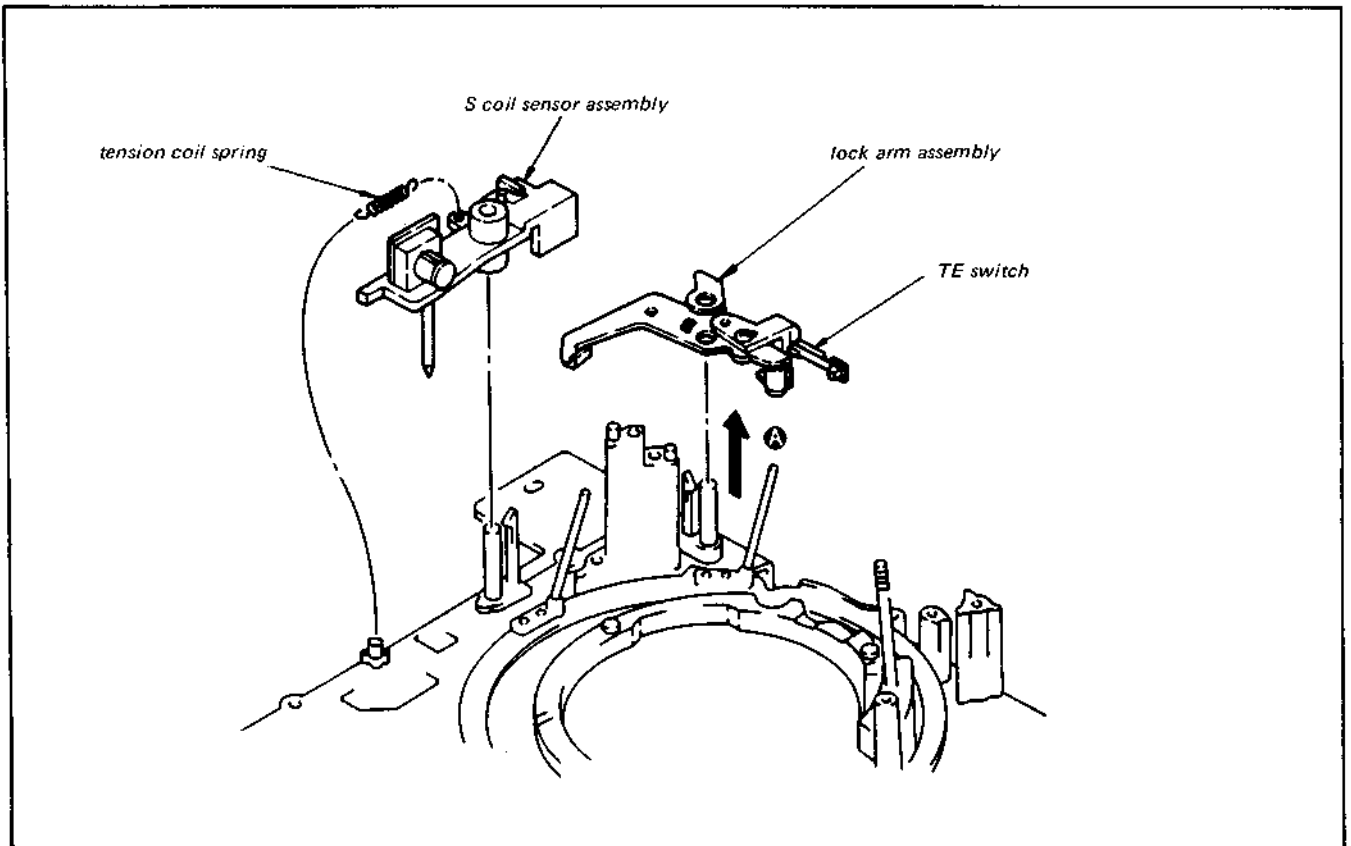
Removal of the TE switch assembly and lock arm assembly
